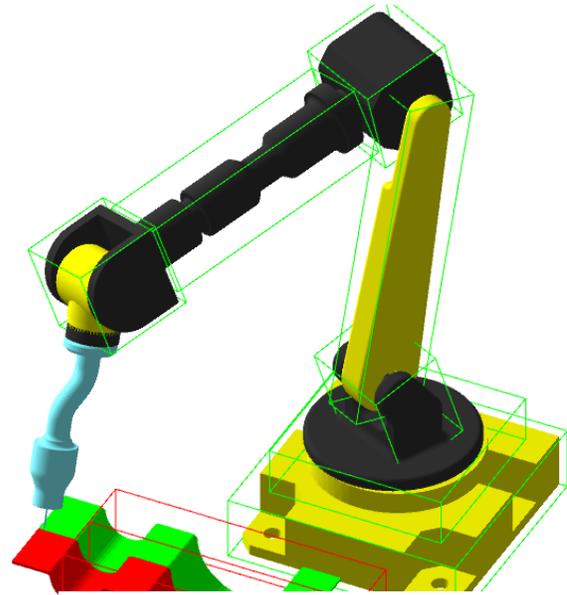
Welding two sheet metal parts along the path requiring linear and circular motion.
